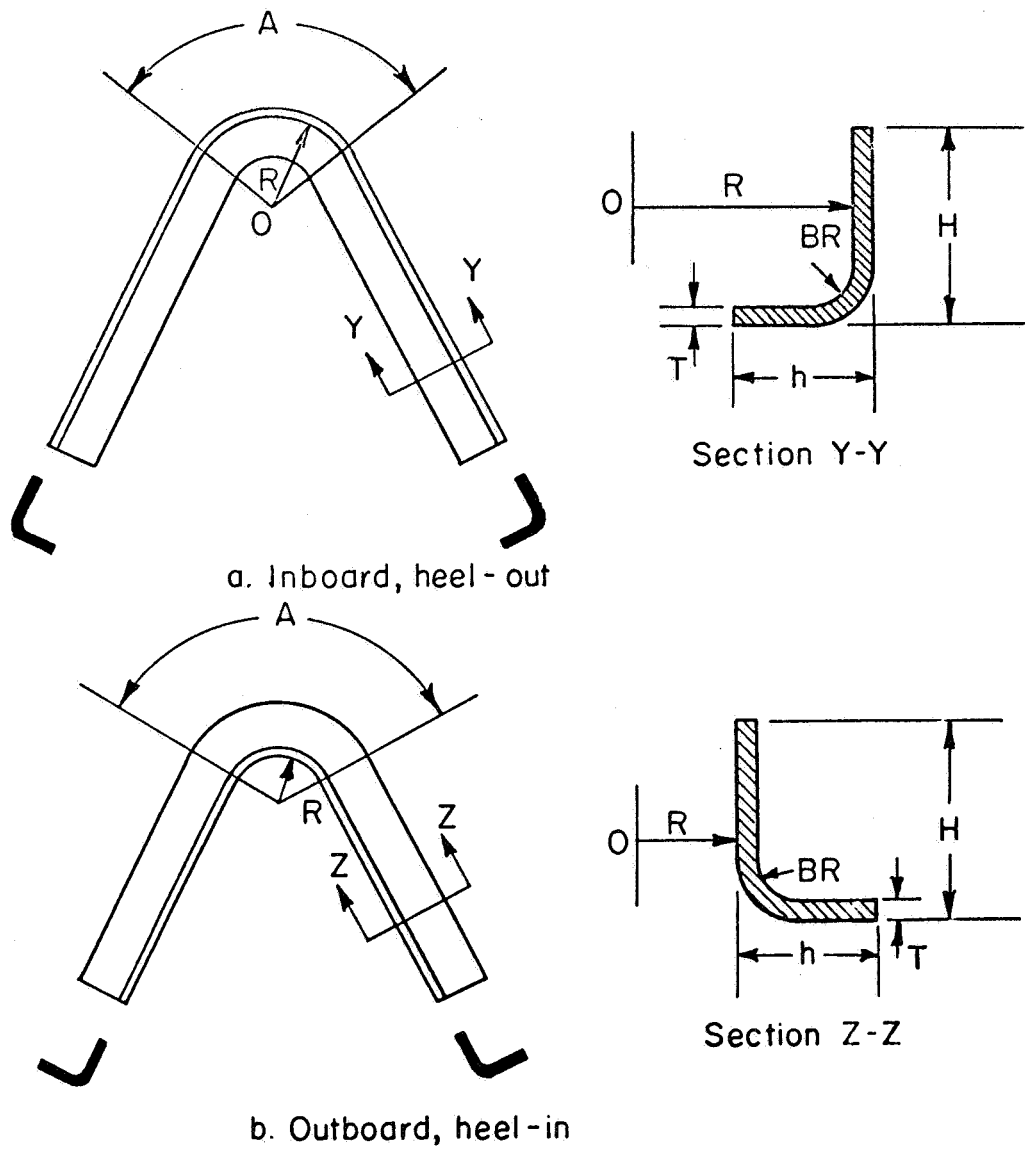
PARAMETERS OF HEEL-IN AND HEEL-OUT LINEAR STRETCH-FORMED ANGLES
